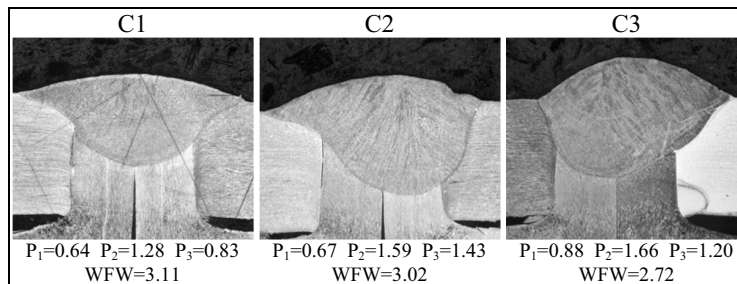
Cross sections from the three conduction welding experiments showing depths of penetration and weld face width (WFW).
